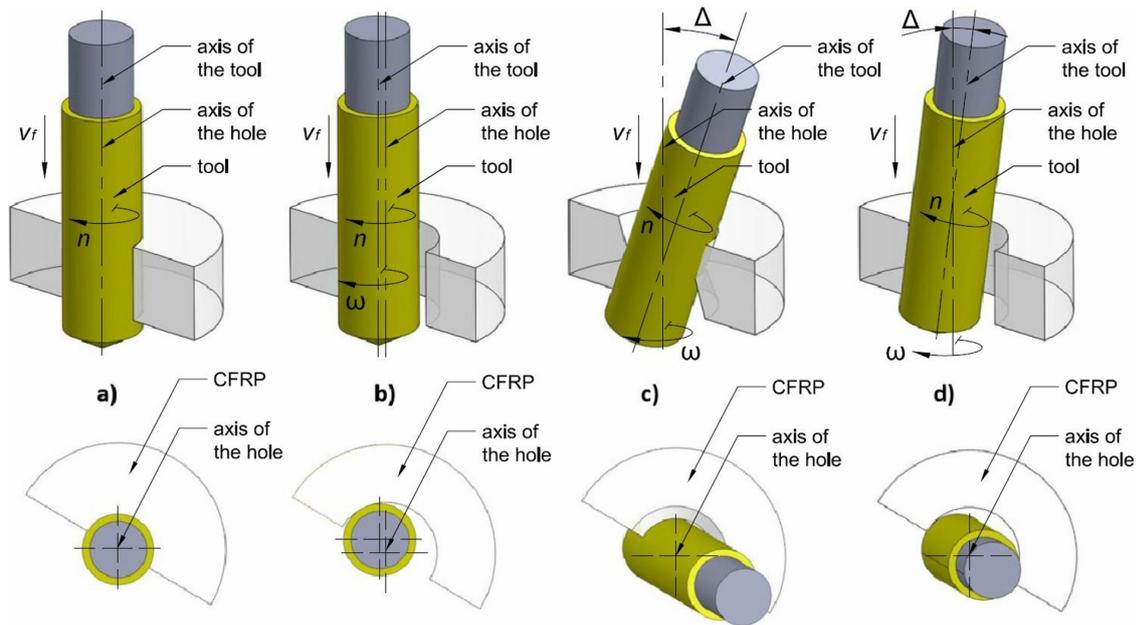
The examined technologies: a) conventional drilling, b) helical milling, c) wobble milling, d) tilted helical milling [3]
